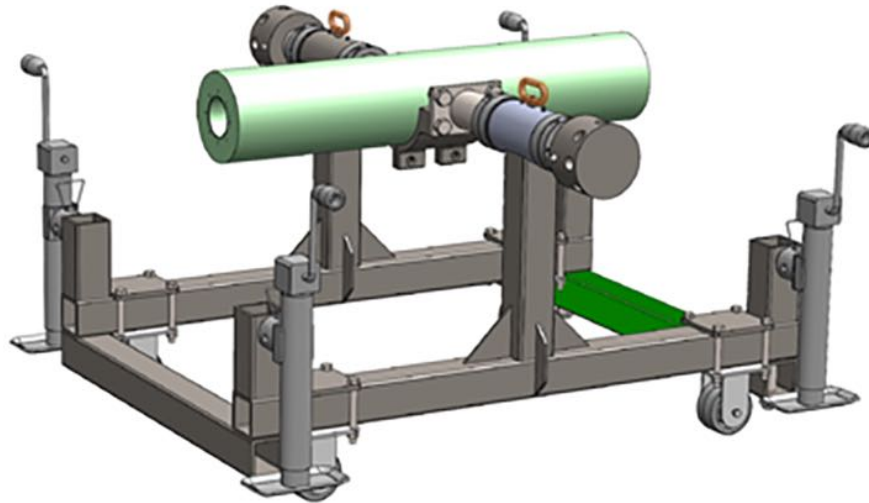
Tube resting in cradle. At this stage, the forklift tines or crane will still be in position (not shown here). Center tube is shown in green in all illustrations only to highlight the main component for visual clarity.
